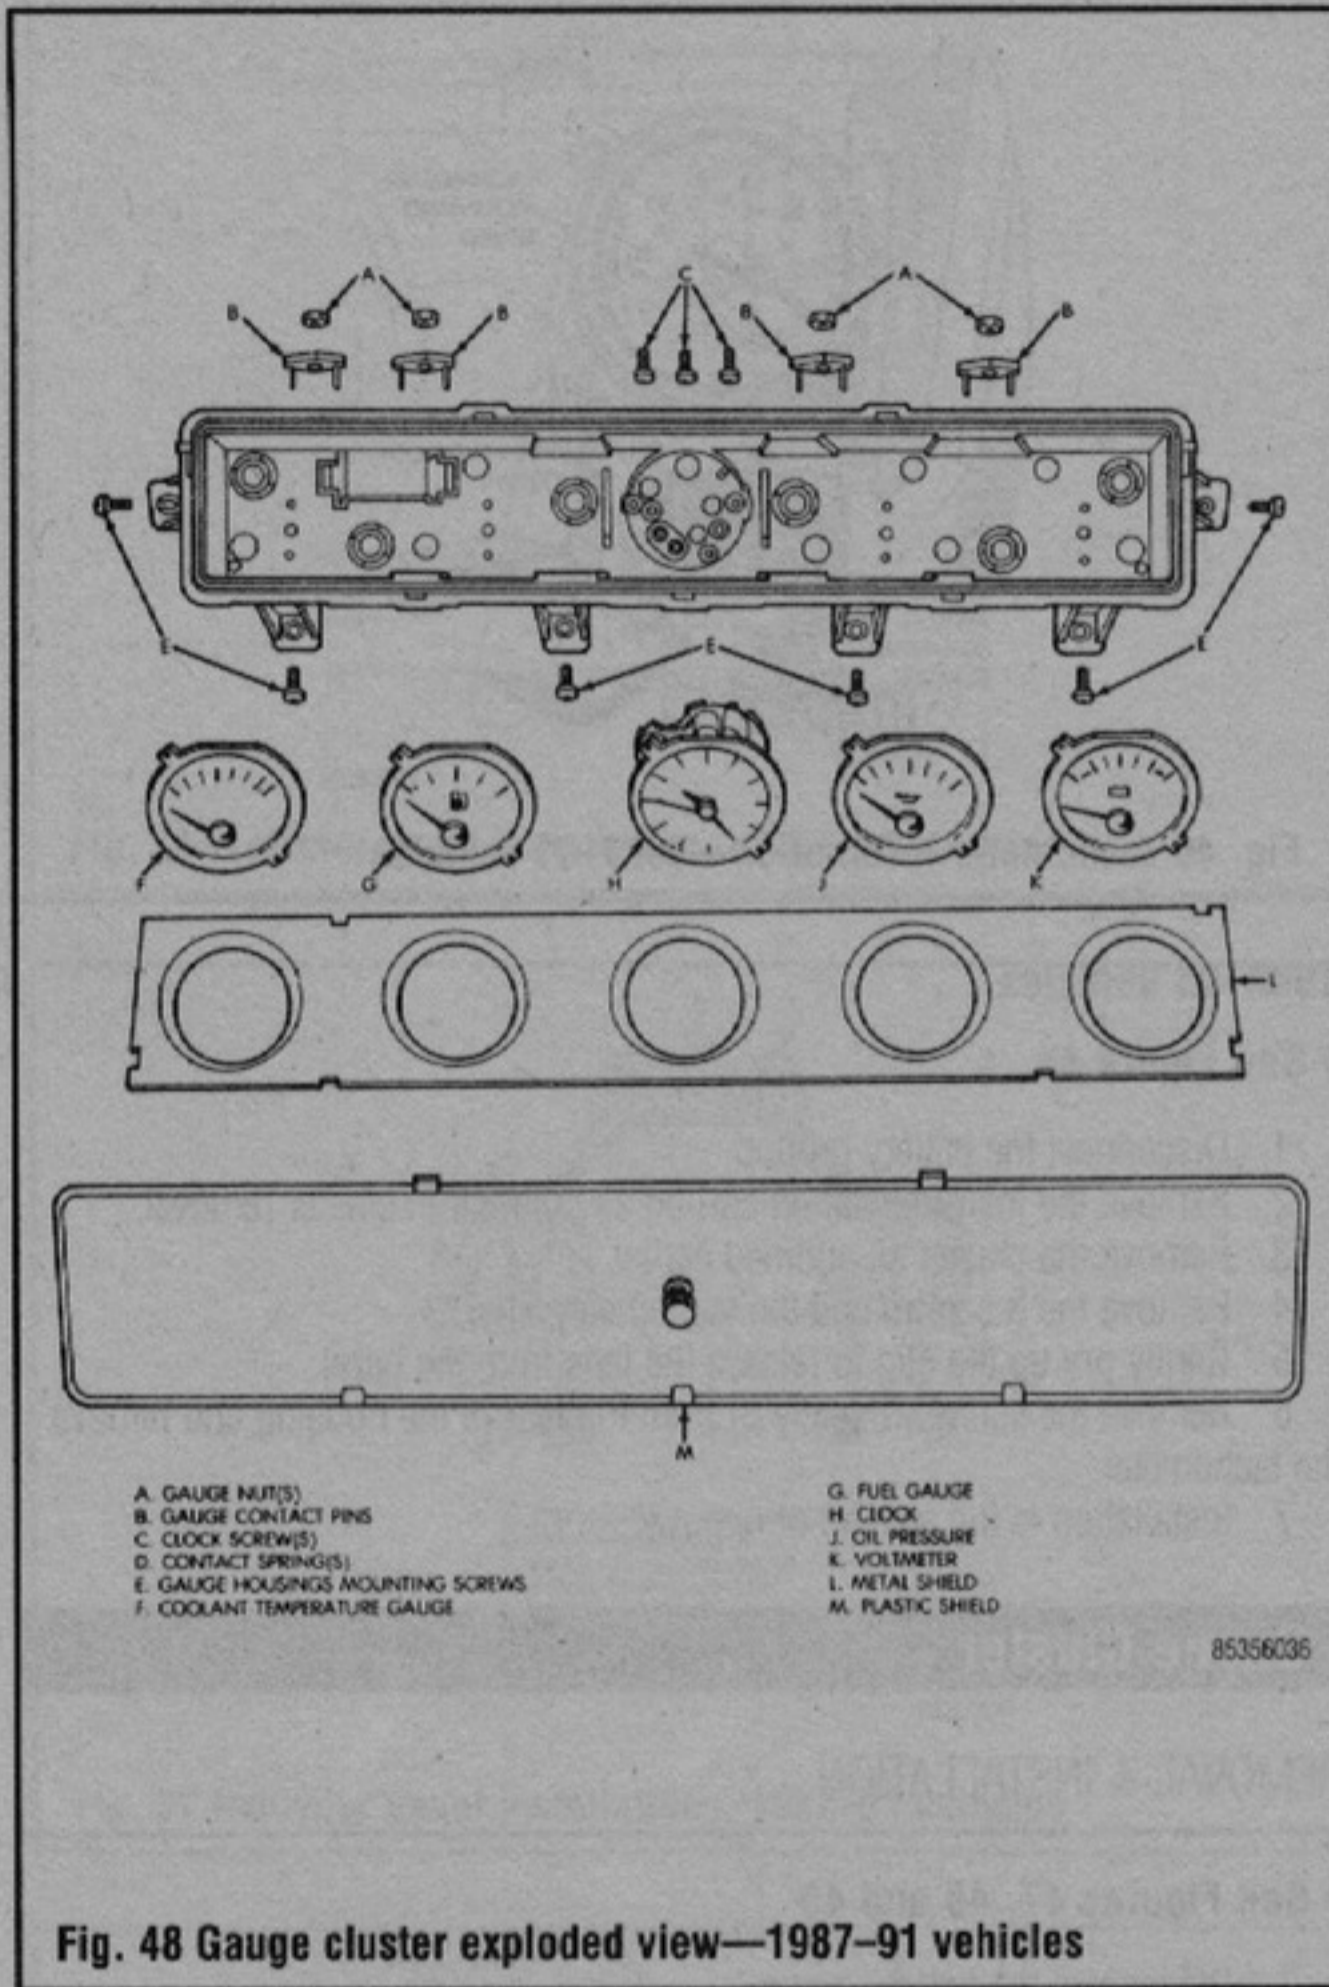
Gauge cluster exploded view—1987-91 vehicles
